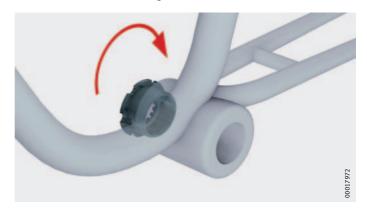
Screwing in the bottom bracket bearing housing on the chain ring side
